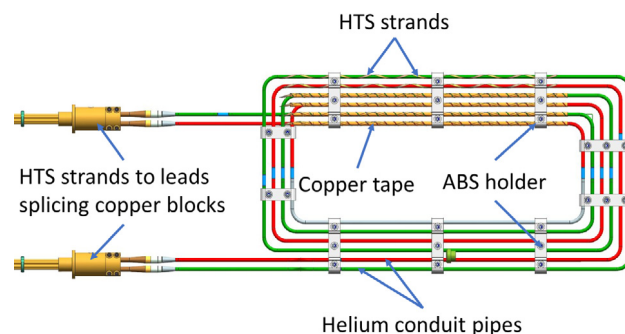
Engineering design of the 3-turn HTS magnet coil.
